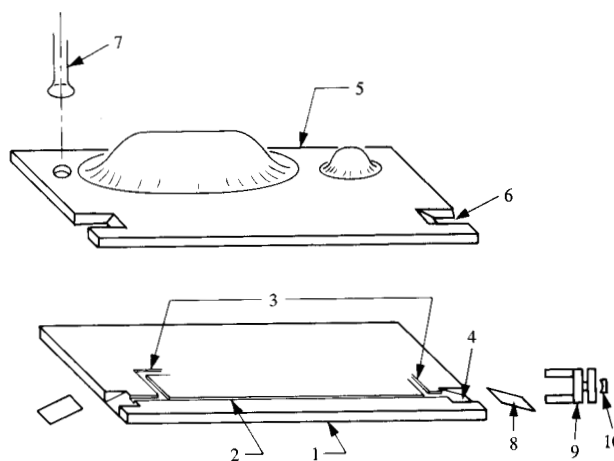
Schematic of the molded plate laser: 1, base panel; 2, bore; 3, anode and cathode connecting channel; 4, 6, Brewster window seat; 5, upper molded panel; 7, tip-off tube; 8, Brewster window; 9, mirror adjust fixture; and 10, mirror.
